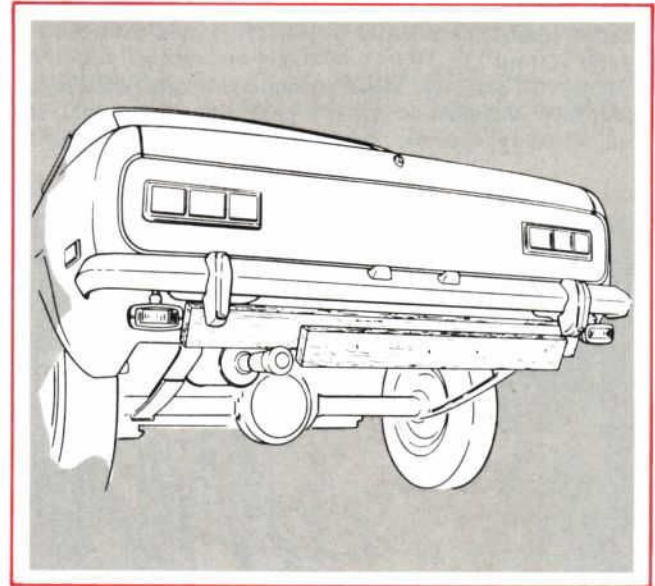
Note that the wood adapter device needed for 1971-72 Capri models is located against the rear lower panel and underneath the lower section of the bumper guards. Any other position will damage sheet metal.
